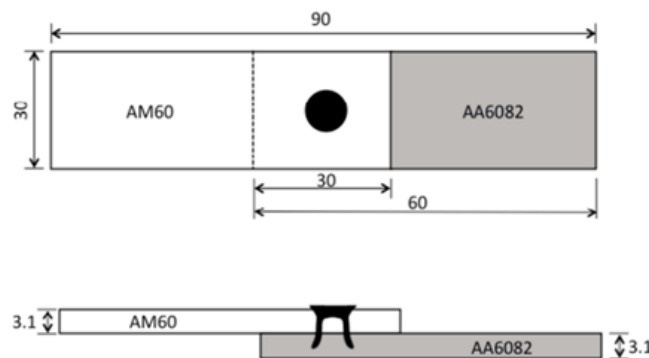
SPR lap-shear coupon joint using Aluminum and Magnesium sheets [52]
